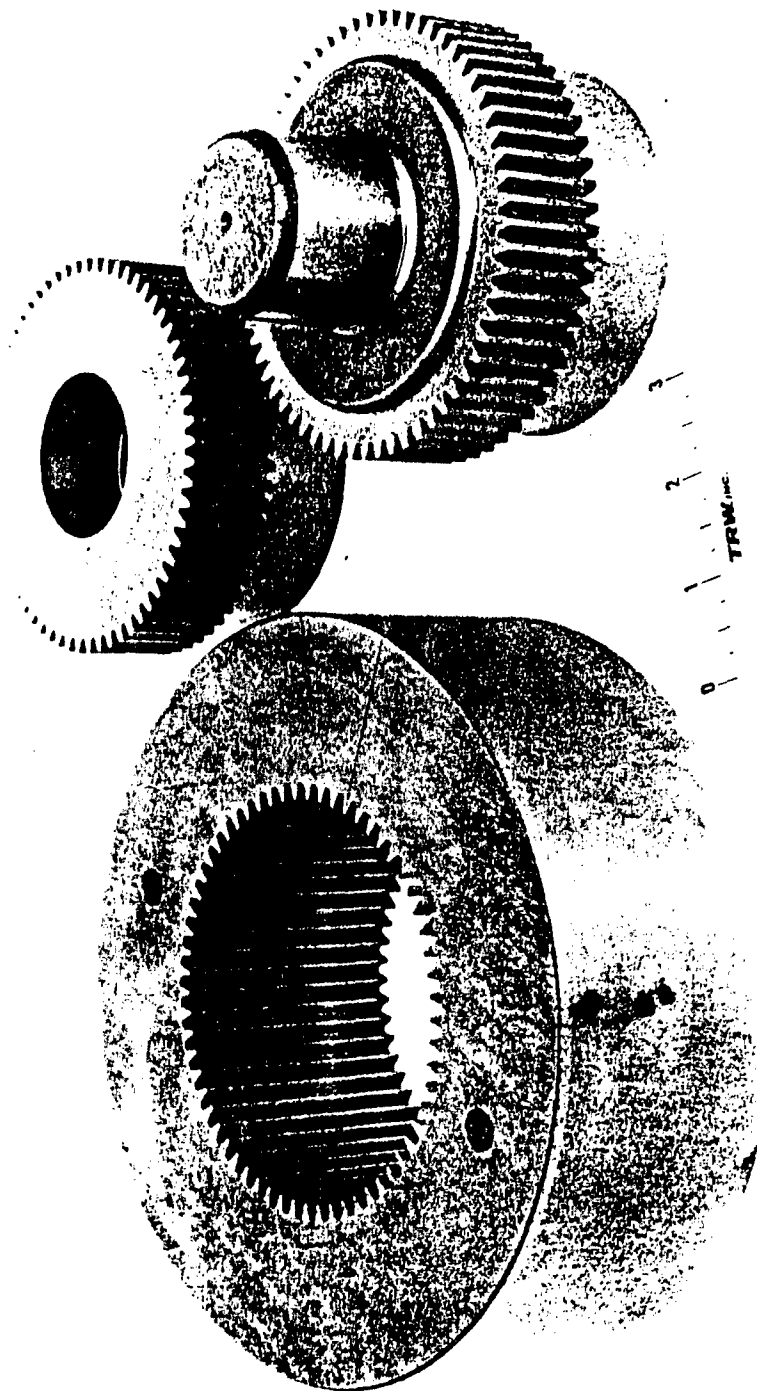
Forging Tooling for AGT 1500 No. 6 Accessory Gear.
